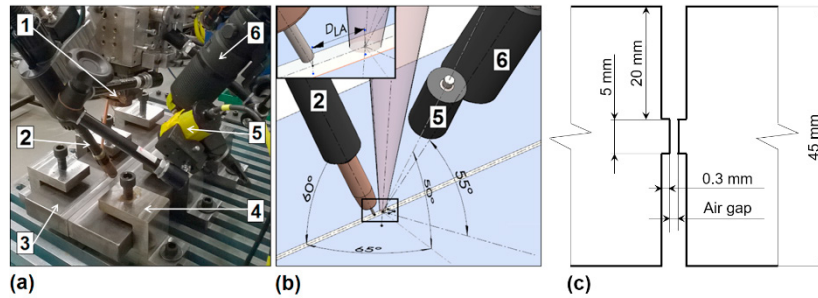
Experimental setup (a, b): 1 – fiber laser beam welding head; 2 – GMAW torch; 3 – workpieces; 4 – fixturing equipment; 5 – illumination diode laser; and 6 – high speed imaging equipment. (c) Groove preparation.
